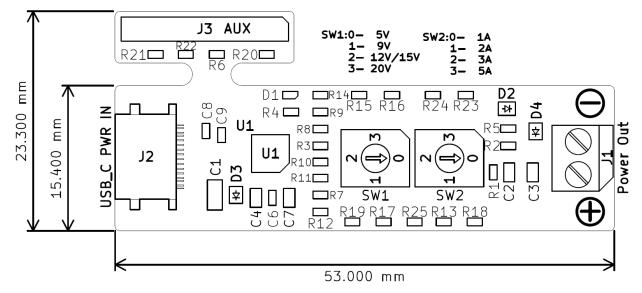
Rev 5 Assembly Drawing Top side with component designators
